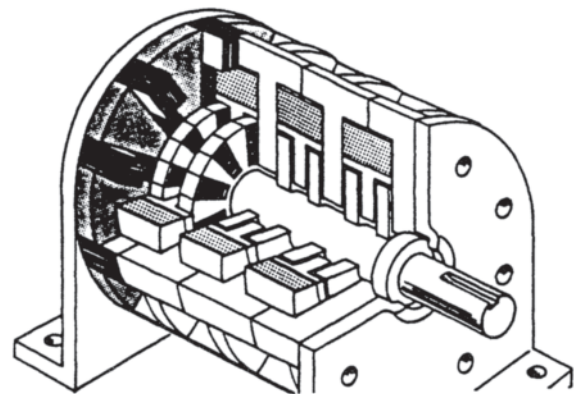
illustrates the geometry of a disk used as the rotor of one phase in this type of step motor; Fig. 2.98 illustrates a cutaway of a schematic diagram of a three-phase disk motor. Smaller versions of this configuration are manufactured with up to nine phases. Figure 2.98 shows 12 sectors per disk; in single-phase operation, each pulse in the exciting coil would result in a  $360/12=30$ -degree steps. With two additional disks on the same shaft and two additional exciting coils, steps of  $30/3=10$  degrees can be realized; with nine phases, 3.33-degree steps are realized. In low-power applications, stamped parts or powdered iron parts can be used for both rotor and stator magnetic sectors. Considering also the simplicity of the solenoidal coil, this stepper motor configuration is among the lowest in cost.
